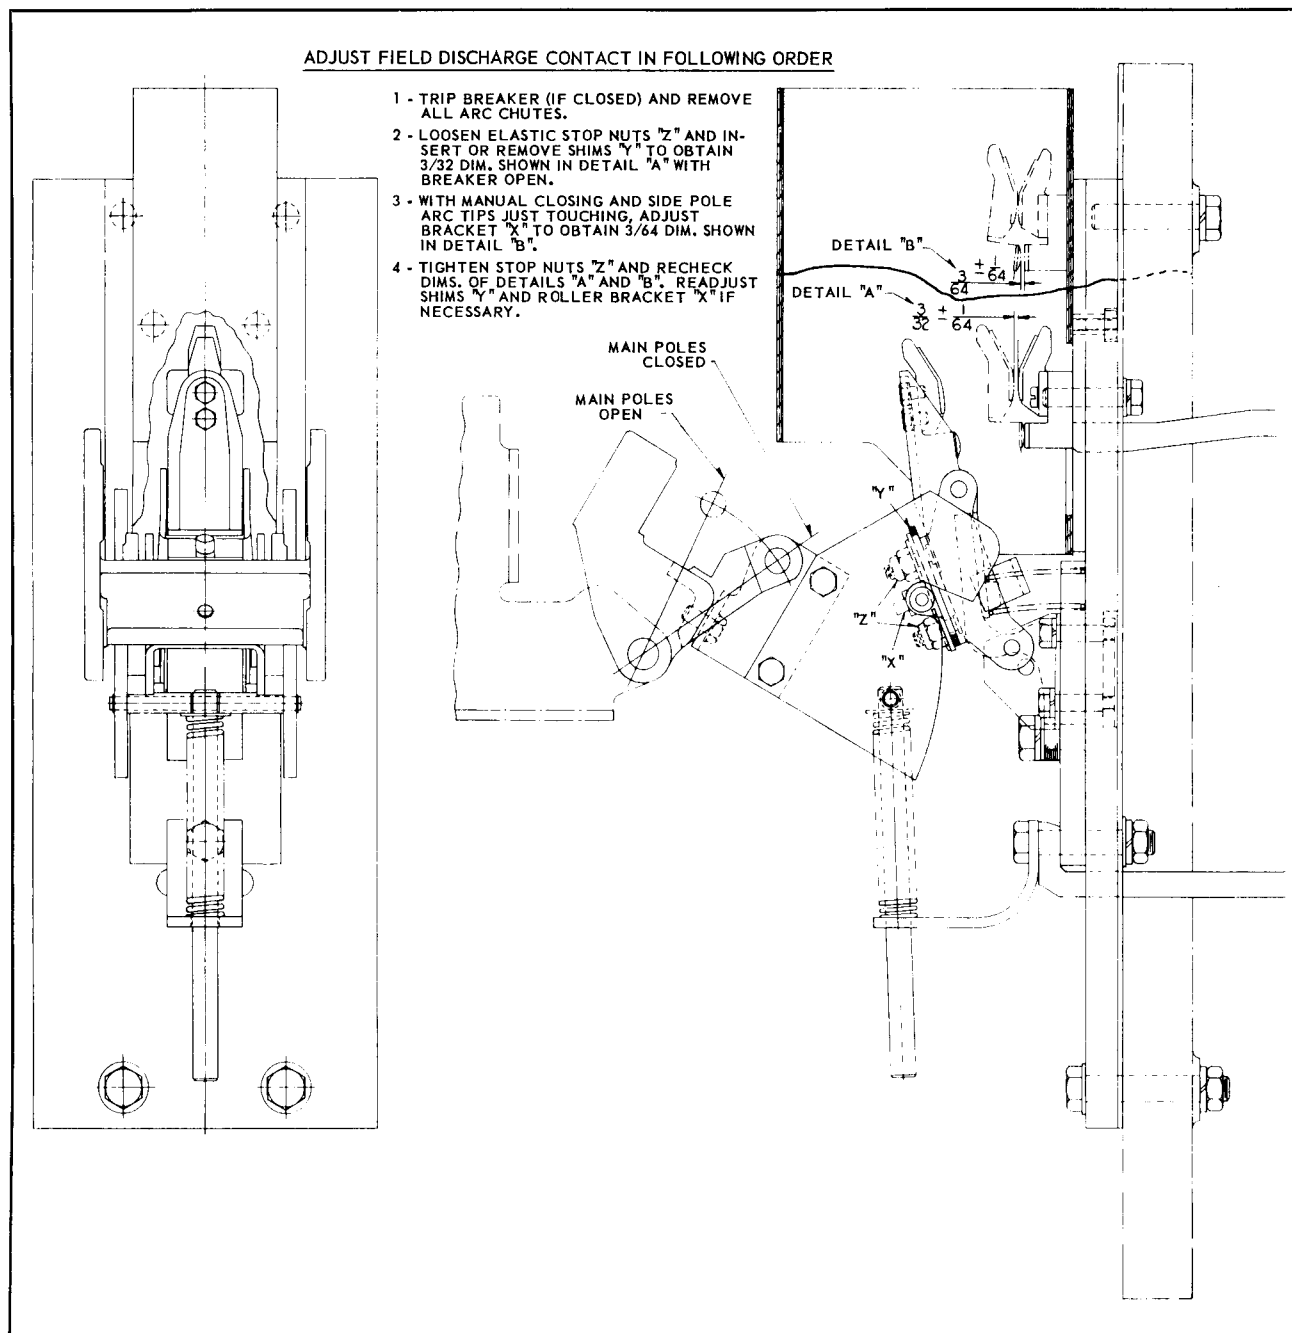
Cross-Section View of Field Discharge Pole Unit
